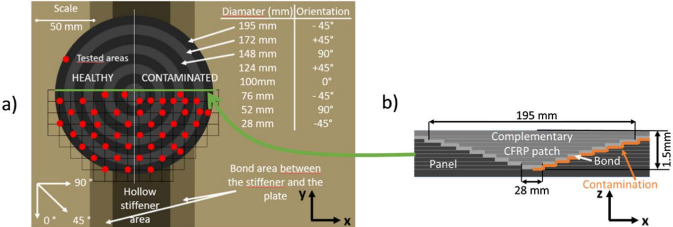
(a) figure of the shot pattern realised on the repair panel and (b) cross-section of the repair patch geometry.
